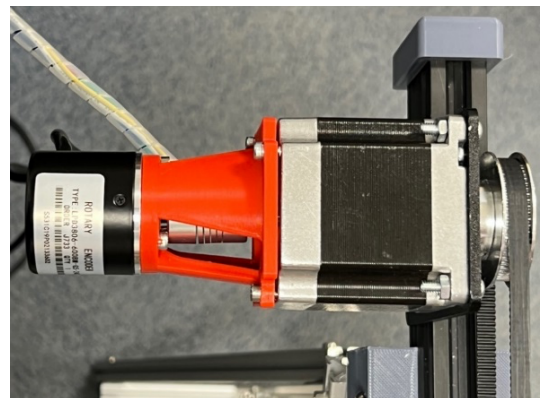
The custom-made mechanical components were 3D printed with PLA using a Creality 6SE printer, such as the encoder mount for the stepper motor.
